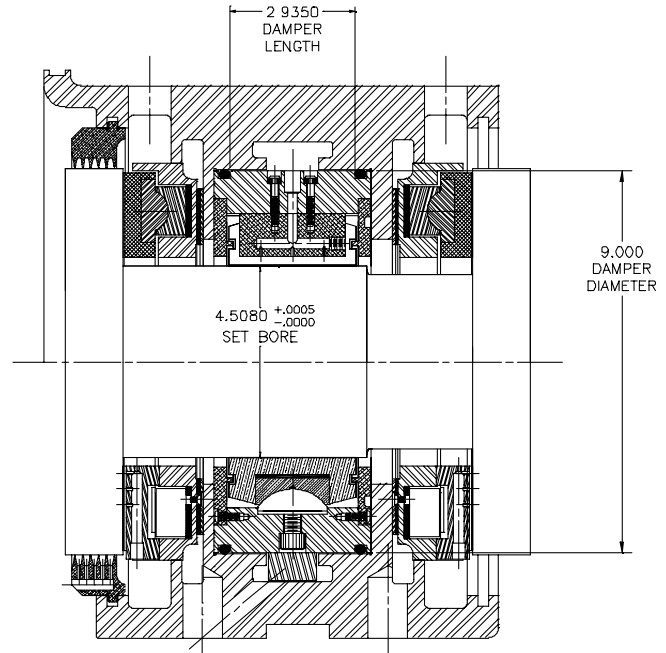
Schematic of Steam End Squeeze Film Damper Bearing.
